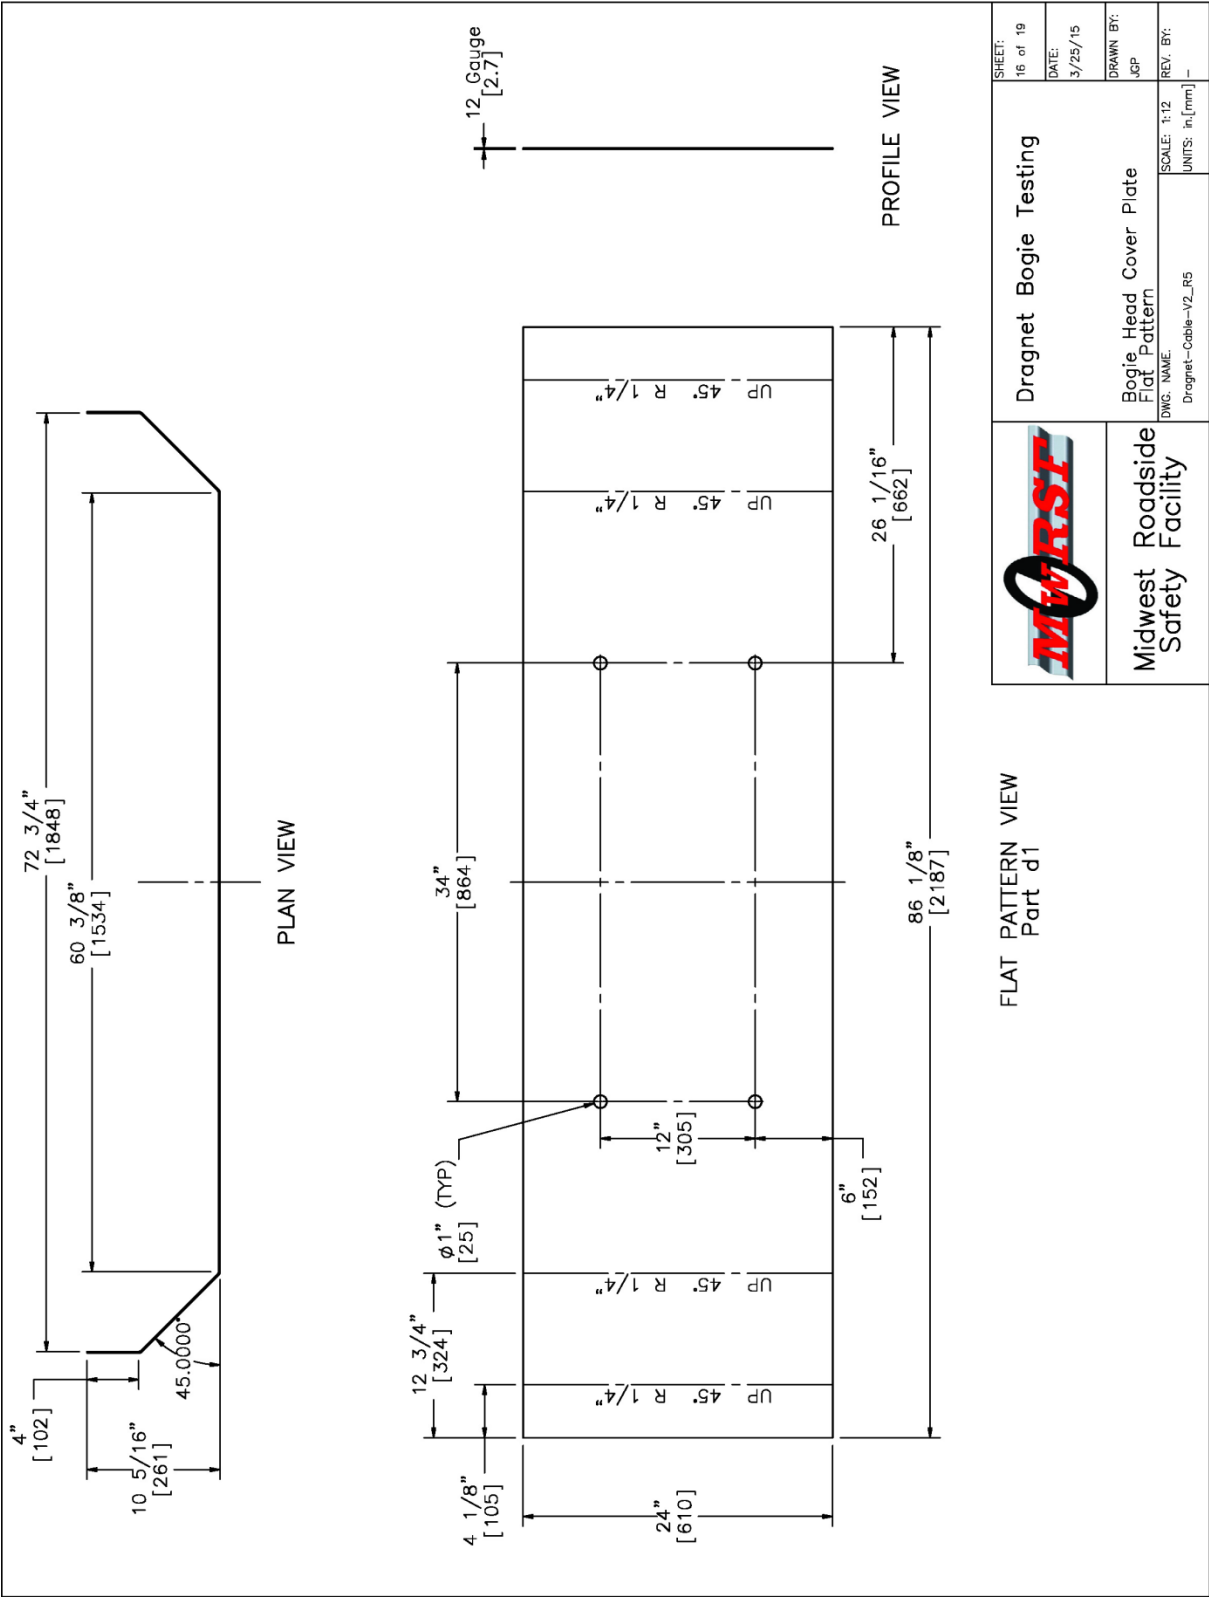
Bogie Head Cover Plate, Flat Pattern, Test Nos. IRA-3 and IRA-4
